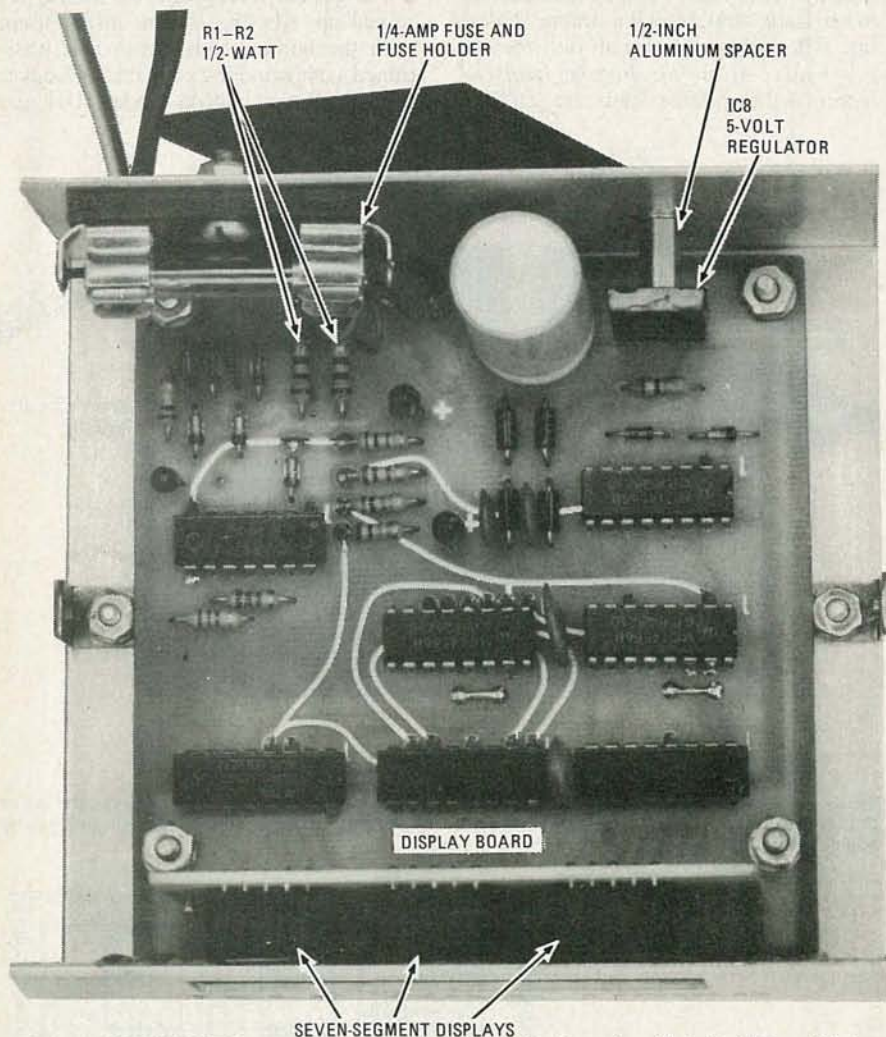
A TOP VIEW OF the completely assembled circuit is shown here. Note that IC8 and the fuse holder are secured to the rear panel of the cabinet.
